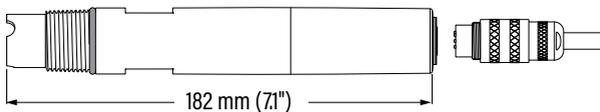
HI1006-1800 industrial pH probe with DIN connector
